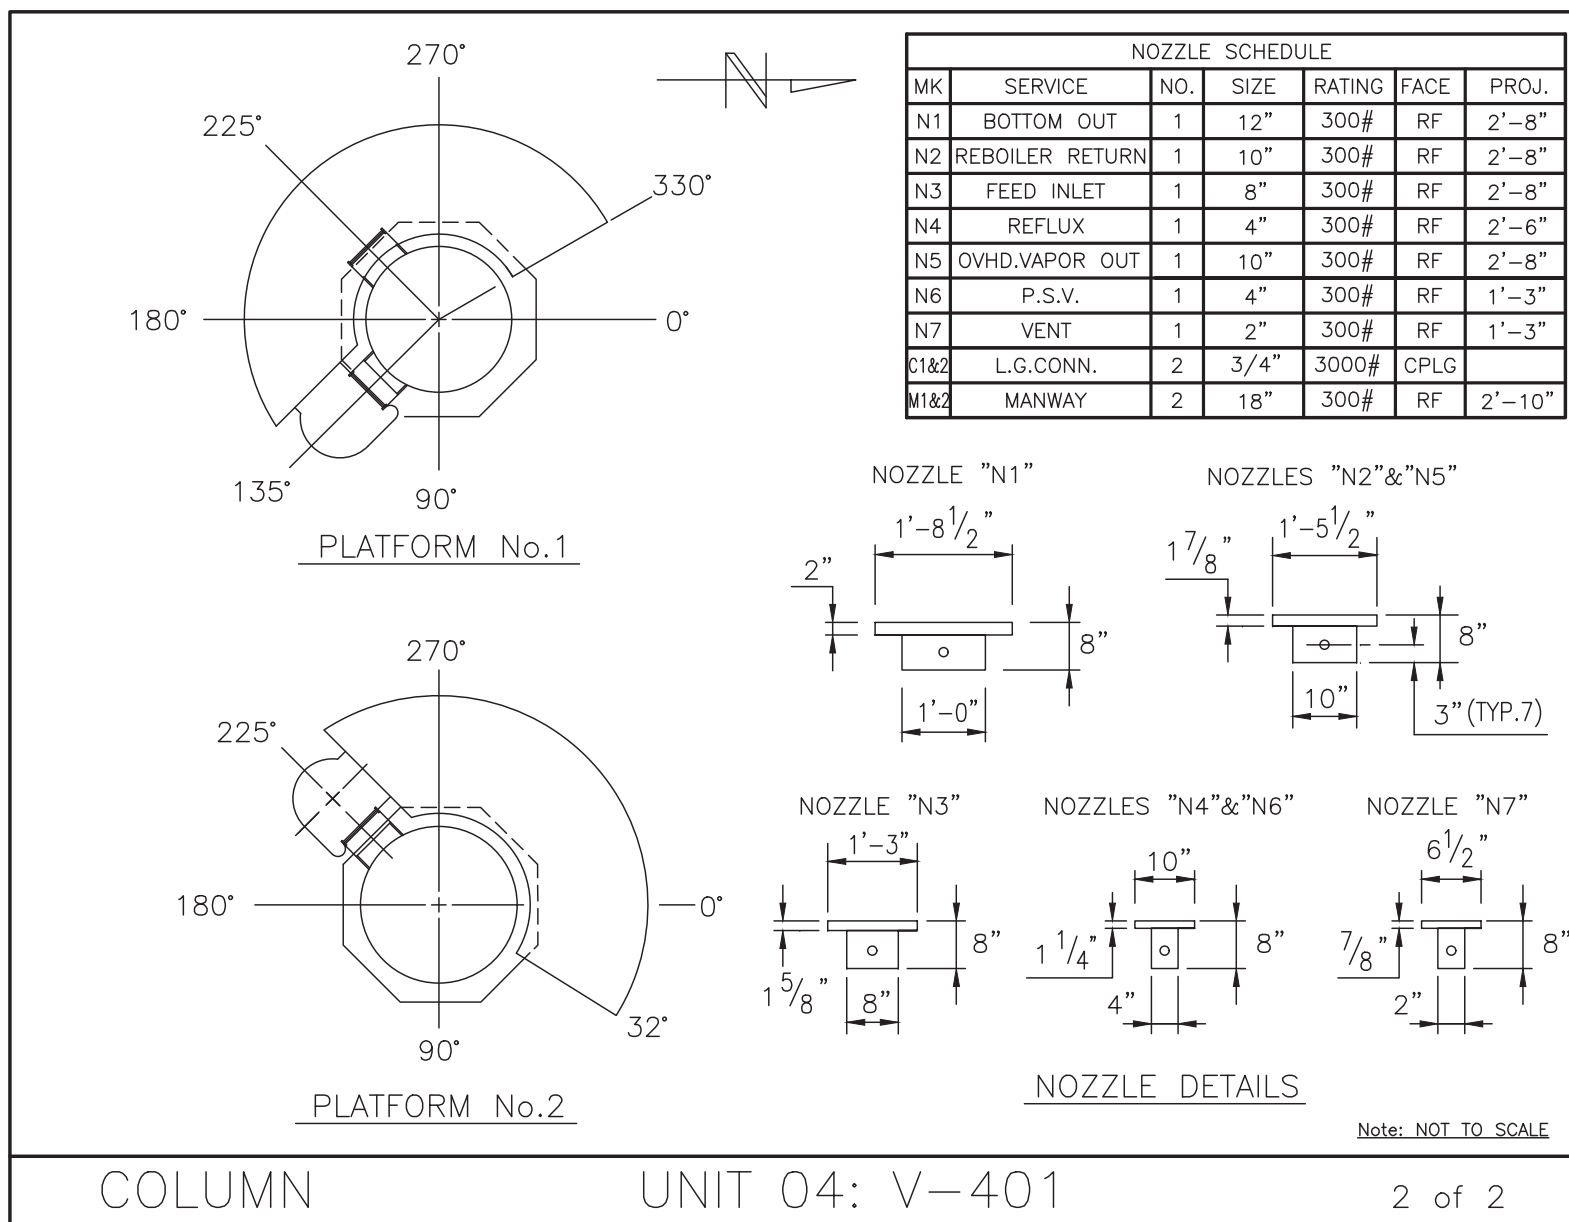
Unit-04: Column 04-V-401 Sheet 2 of 2.
